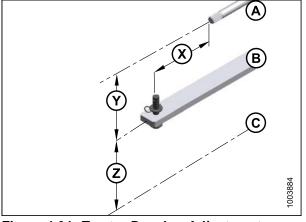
Tractor Drawbar AdjustmentsA - PTOB - Tractor DrawbarC - GroundX - Dimension XY - Dimension YZ - Dimension Z
